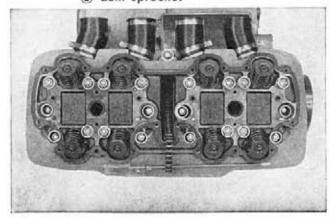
Removing cylinder head mounting nuts and bolts
